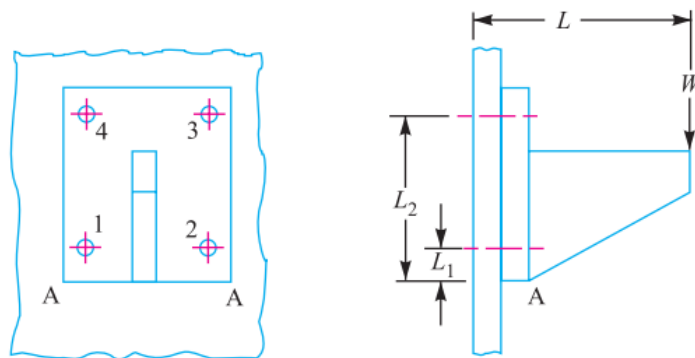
Eccentric load perpendicular to the axis of bolts.
